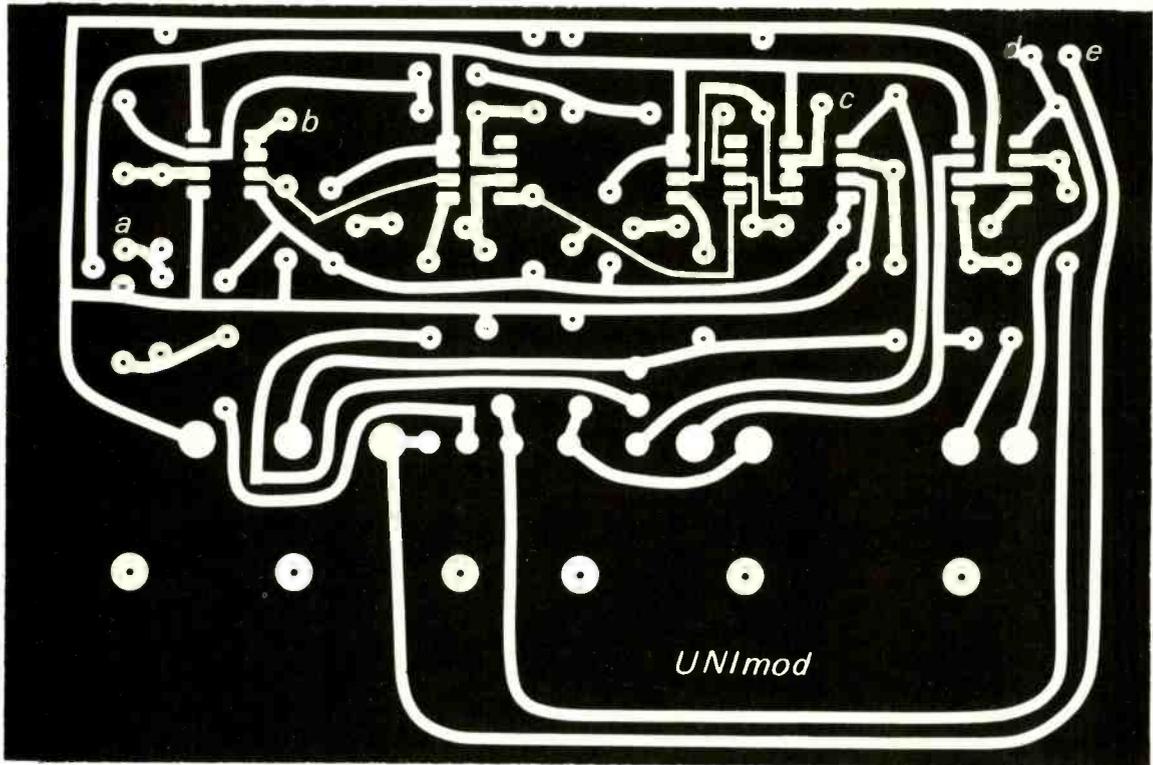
Full-size etching and drilling guide for the printed circuit board for the UniMod.
